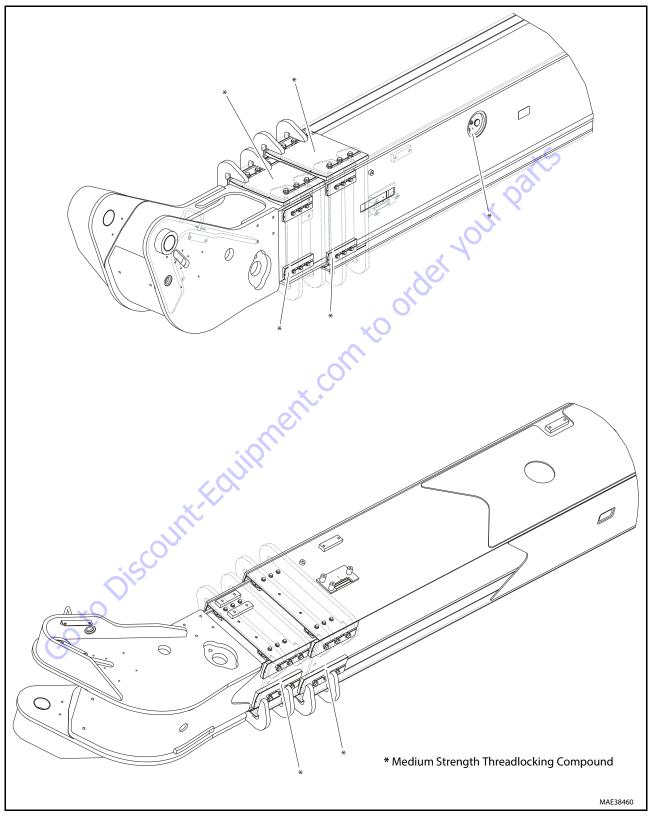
Locations for JLG Threadlocker Application - Sheet 2 of 5
